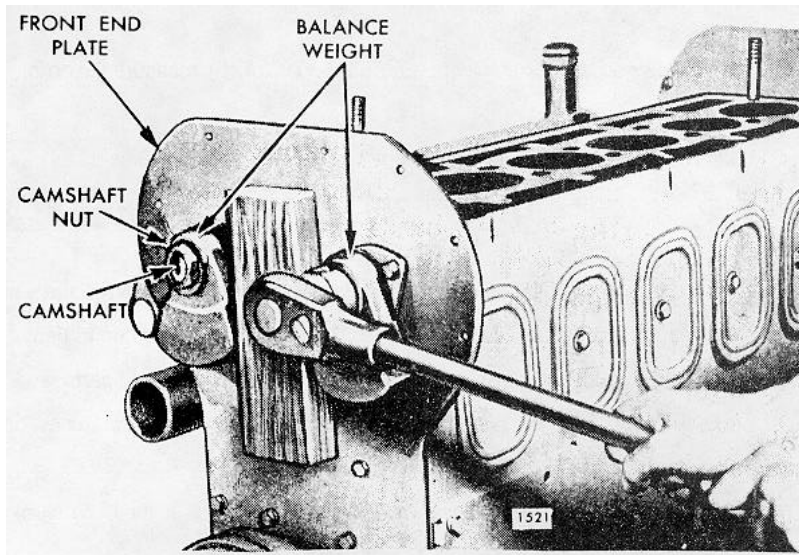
Loosening Nut on Camshaft or Balance Shaft.
